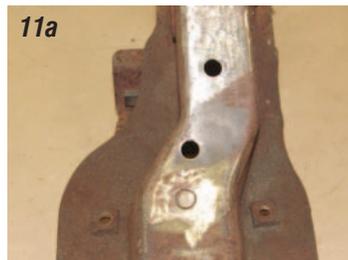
& 11b: On the 1957 pedal assembly both 3/8" holes must be drilled for the clutch master cylinder bracket. The rear edge of the bracket should be located 2-7/8" from the rear edge of the pedal assembly. The original support rods from the pedal assembly to cowl will no longer be used.
